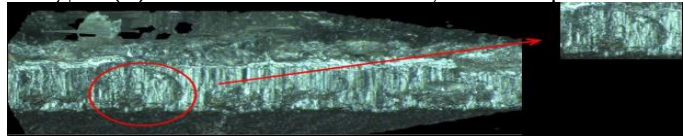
(b) Tool wear without GO, $r = 39.14 \mu\text{m}$
